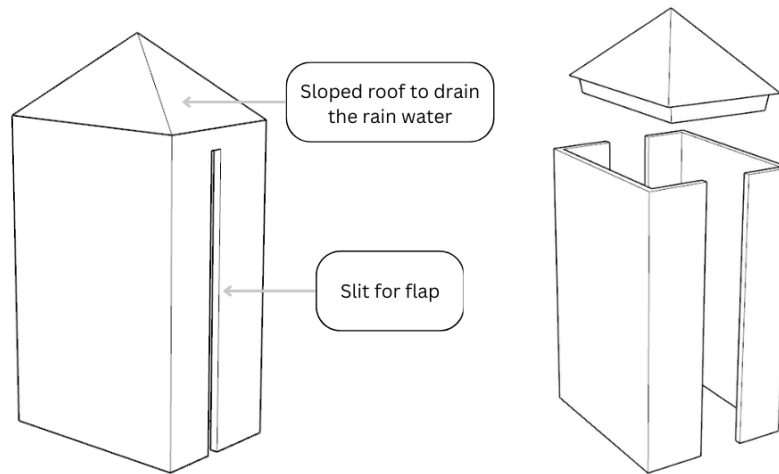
The wi-fi-no-tifier electronic enclosure (left); Three divided parts for mold press (right)
